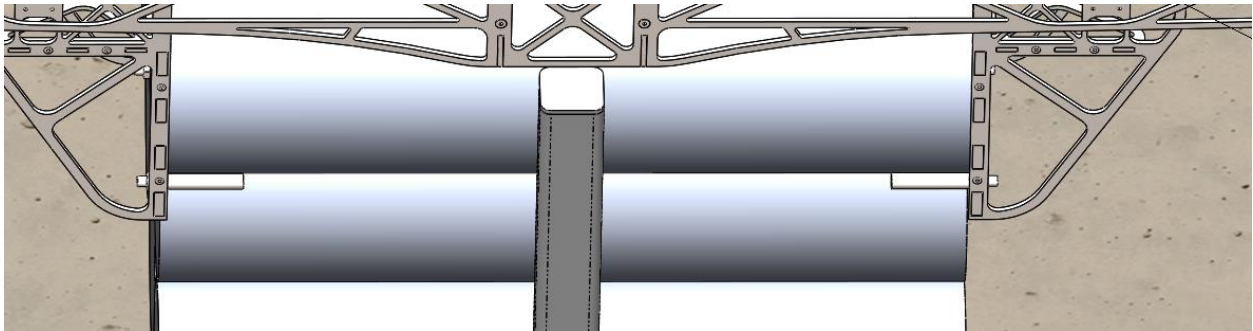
Gripper side plate impacting with the billet rack upright. This screenshot shows the gripper assembly #03-0000-A and is from the plant layout assembly #00-0000-0.
